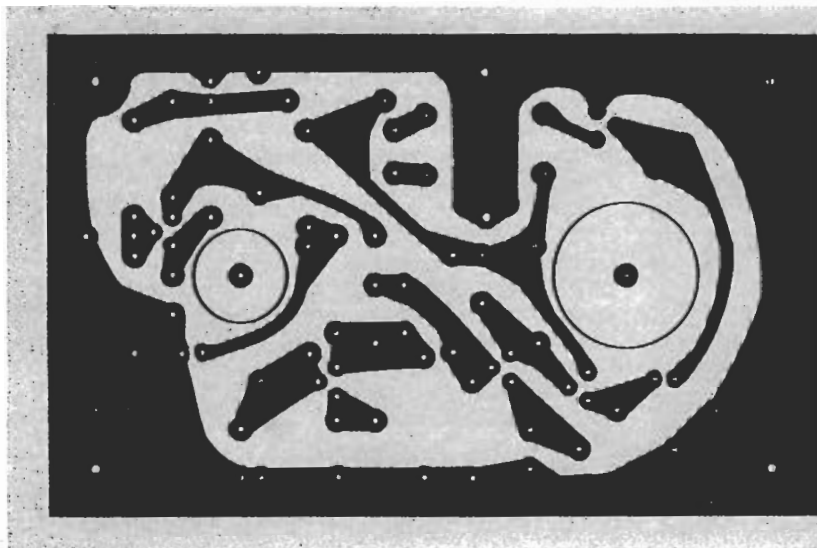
Actual size drawing of foil side of printed circuit (left) will help you make your own board. Parts are installed on the plain side of the board as shown above. Figure 4 shows parts assembled on board.
